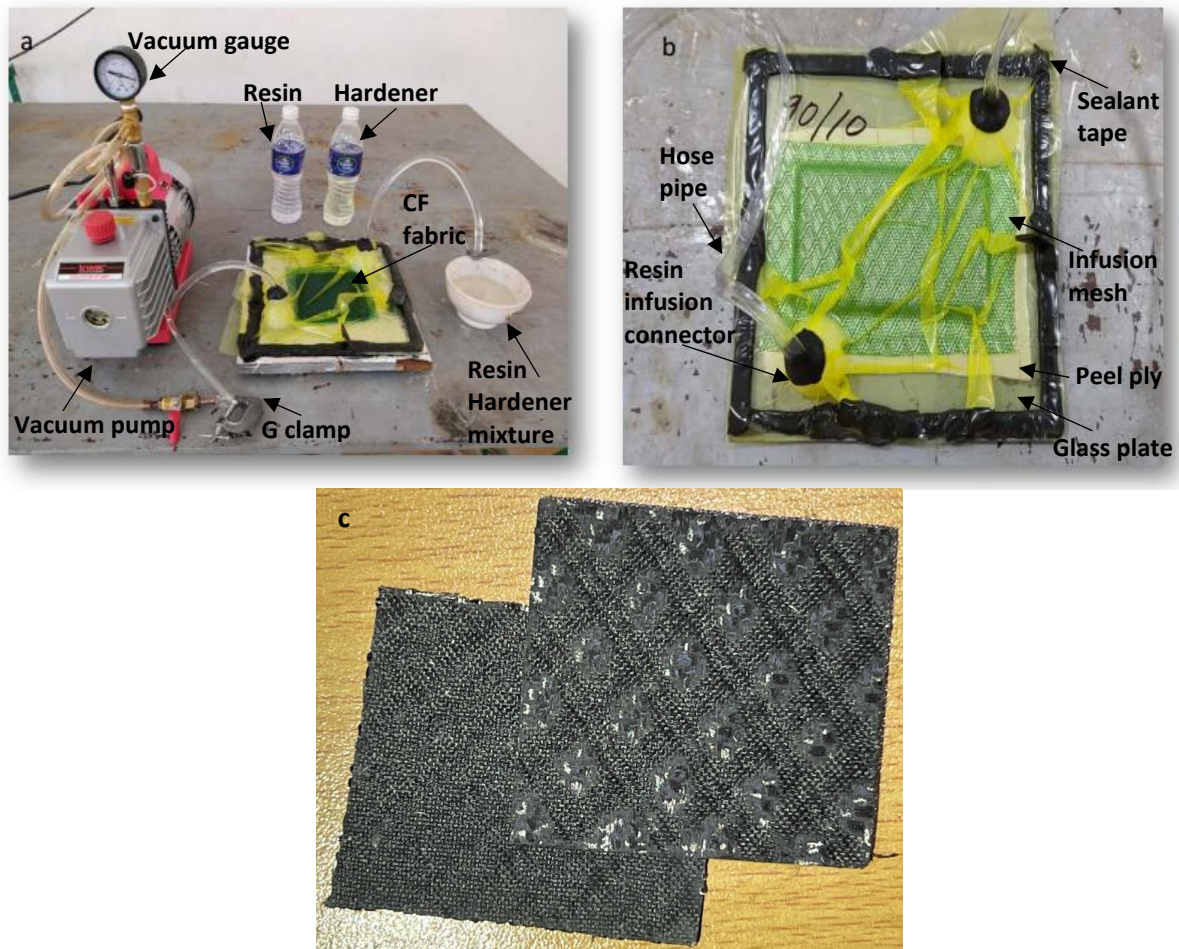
Composite preparation using VARTM, (a) laboratory setup, (b) mould surface after resin infusion, (c) fabricated composite sample
